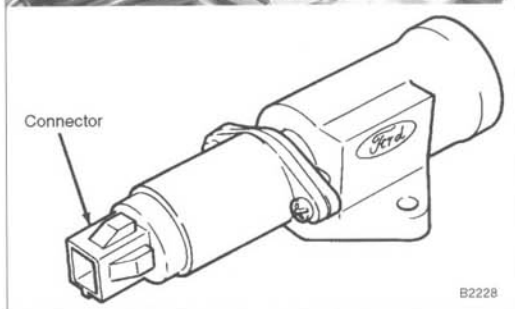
Throttle-Bypass Air (ISC) valve usually mounts on throttle body to provide a passage around throttle plate.
